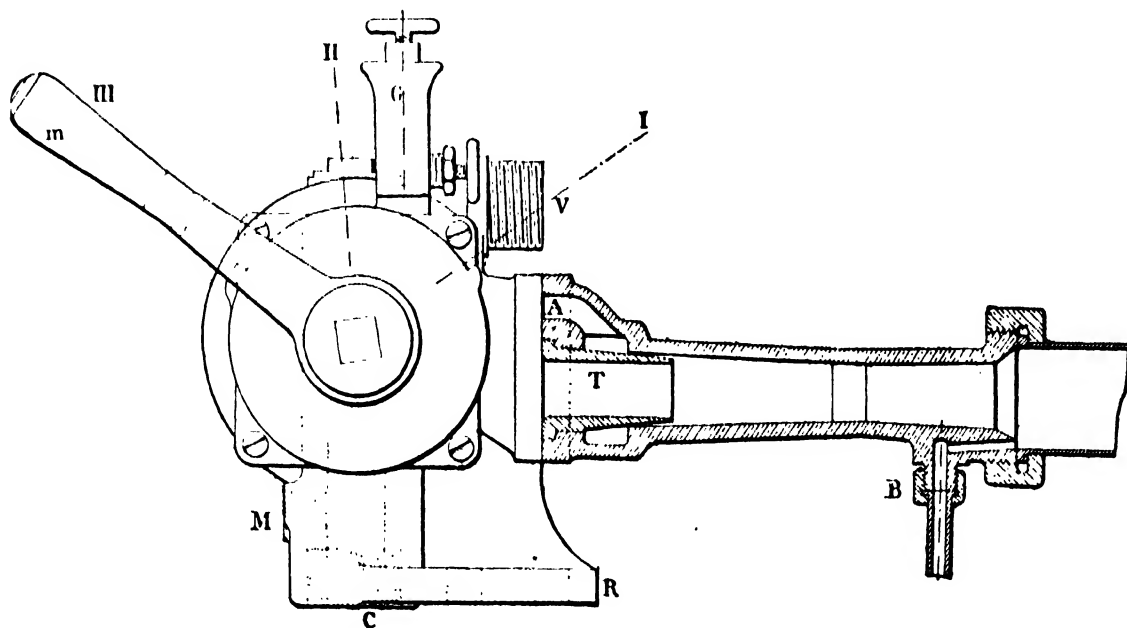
Controlling Mechanism of the Soulerin Brake
